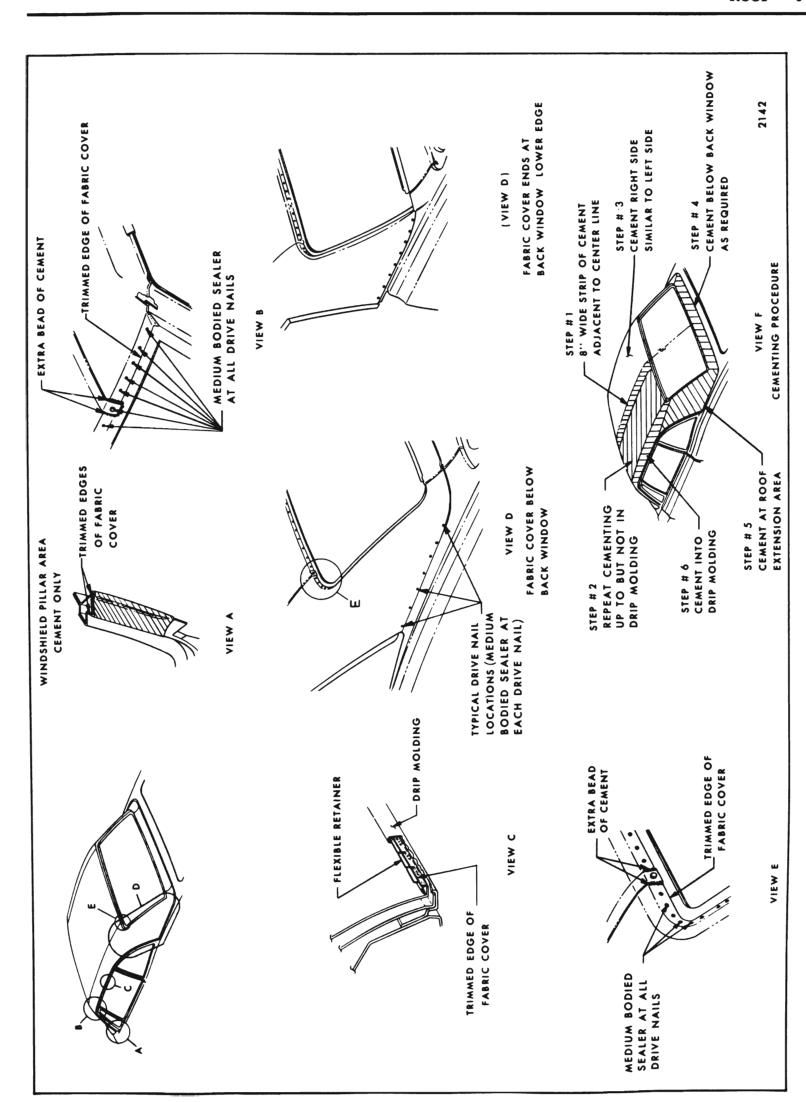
Fabric Roof Cover Installation – Styles without Roof Panel Molding
